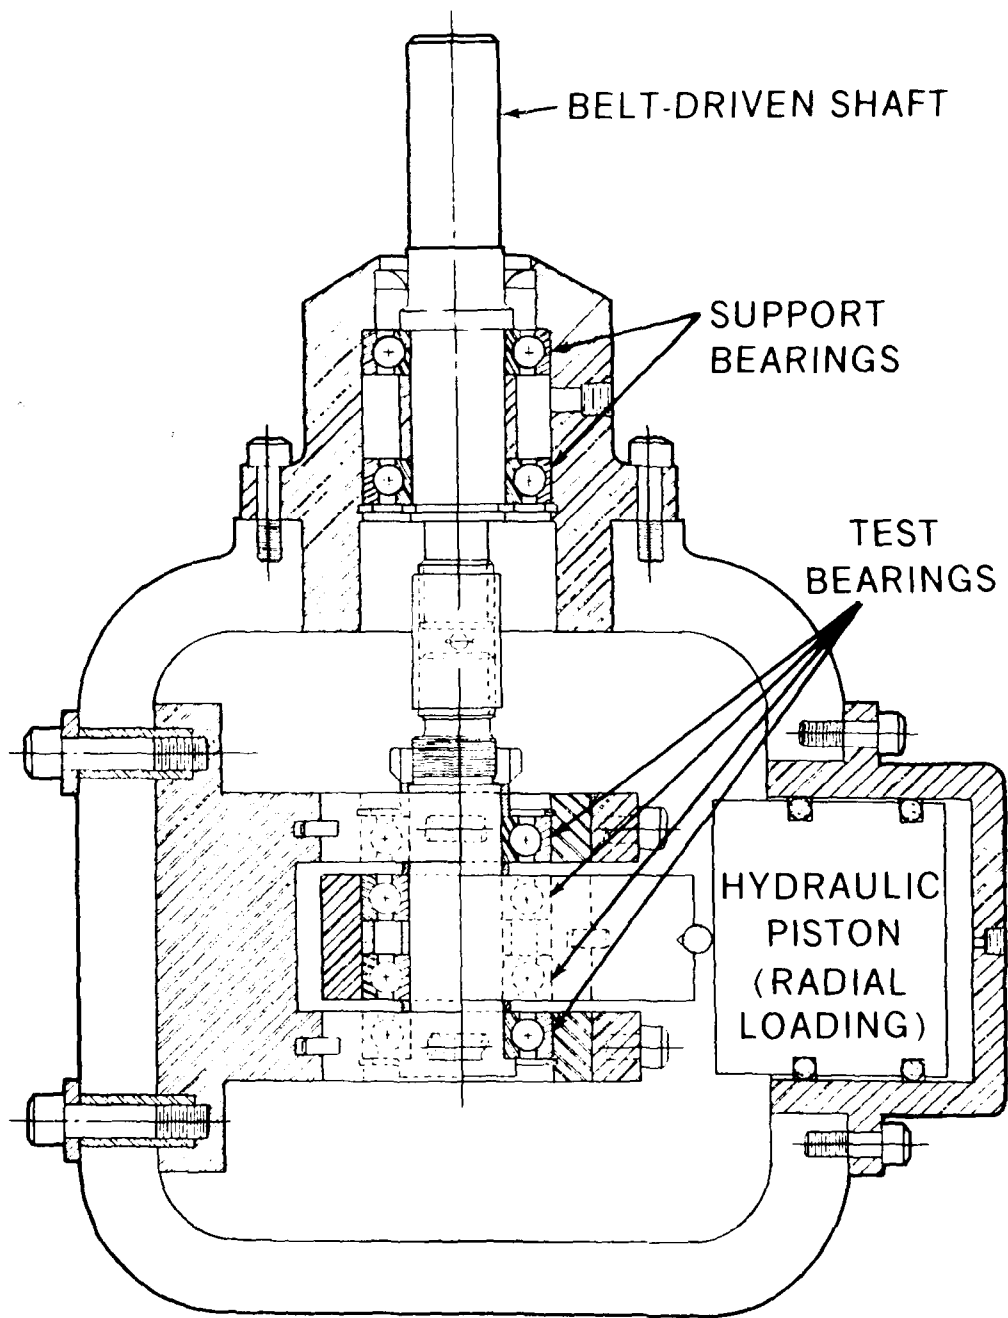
Schematic of a Ball-Bearing Fatigue-Test Machine.
